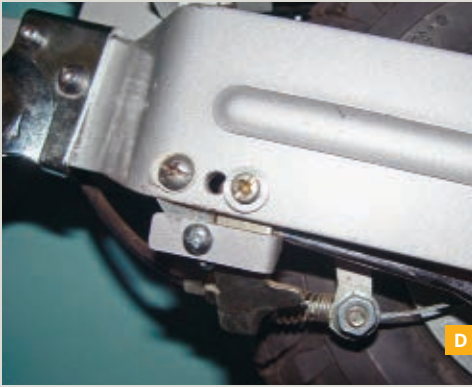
Fig. D: Rear axle and brake moved back on the swing arm to accommodate a larger rear wheel.
